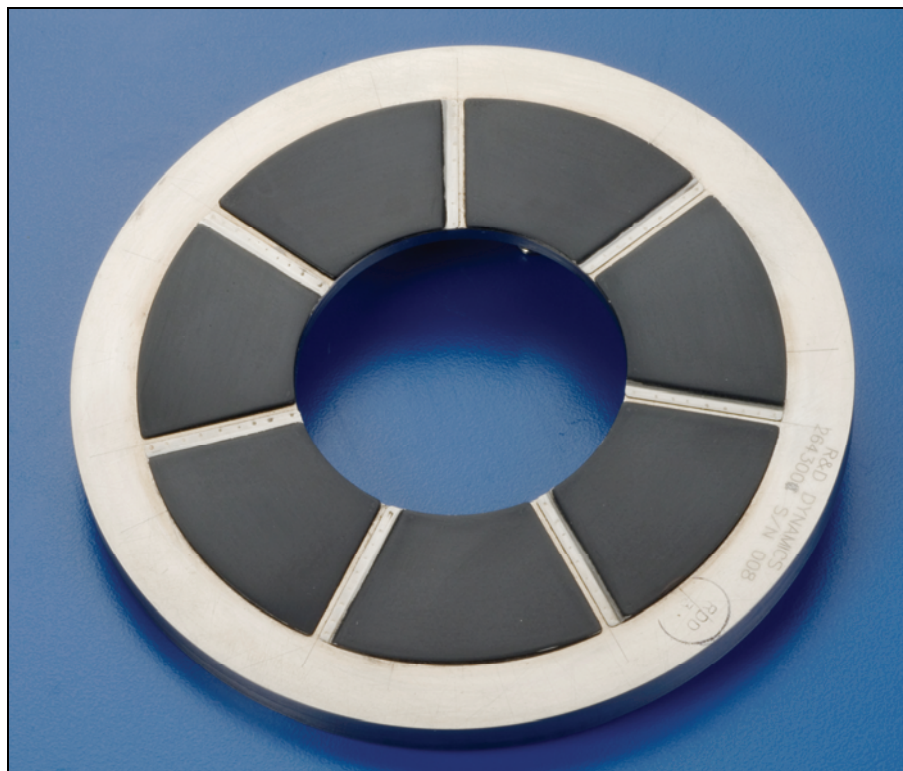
Photograph of a seven pad PTFE-coated thrust bearing.
